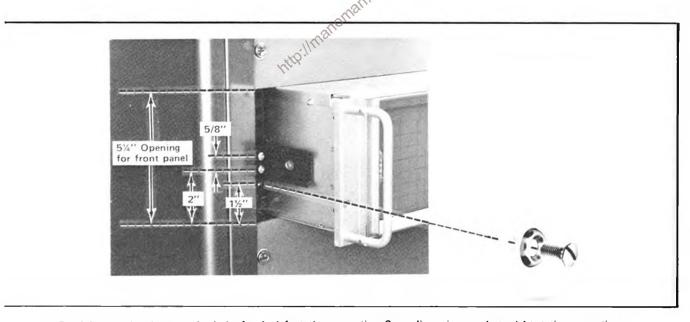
Locating the mounting holes for the left stationary section. Same dimensions apply to right stationary section.
